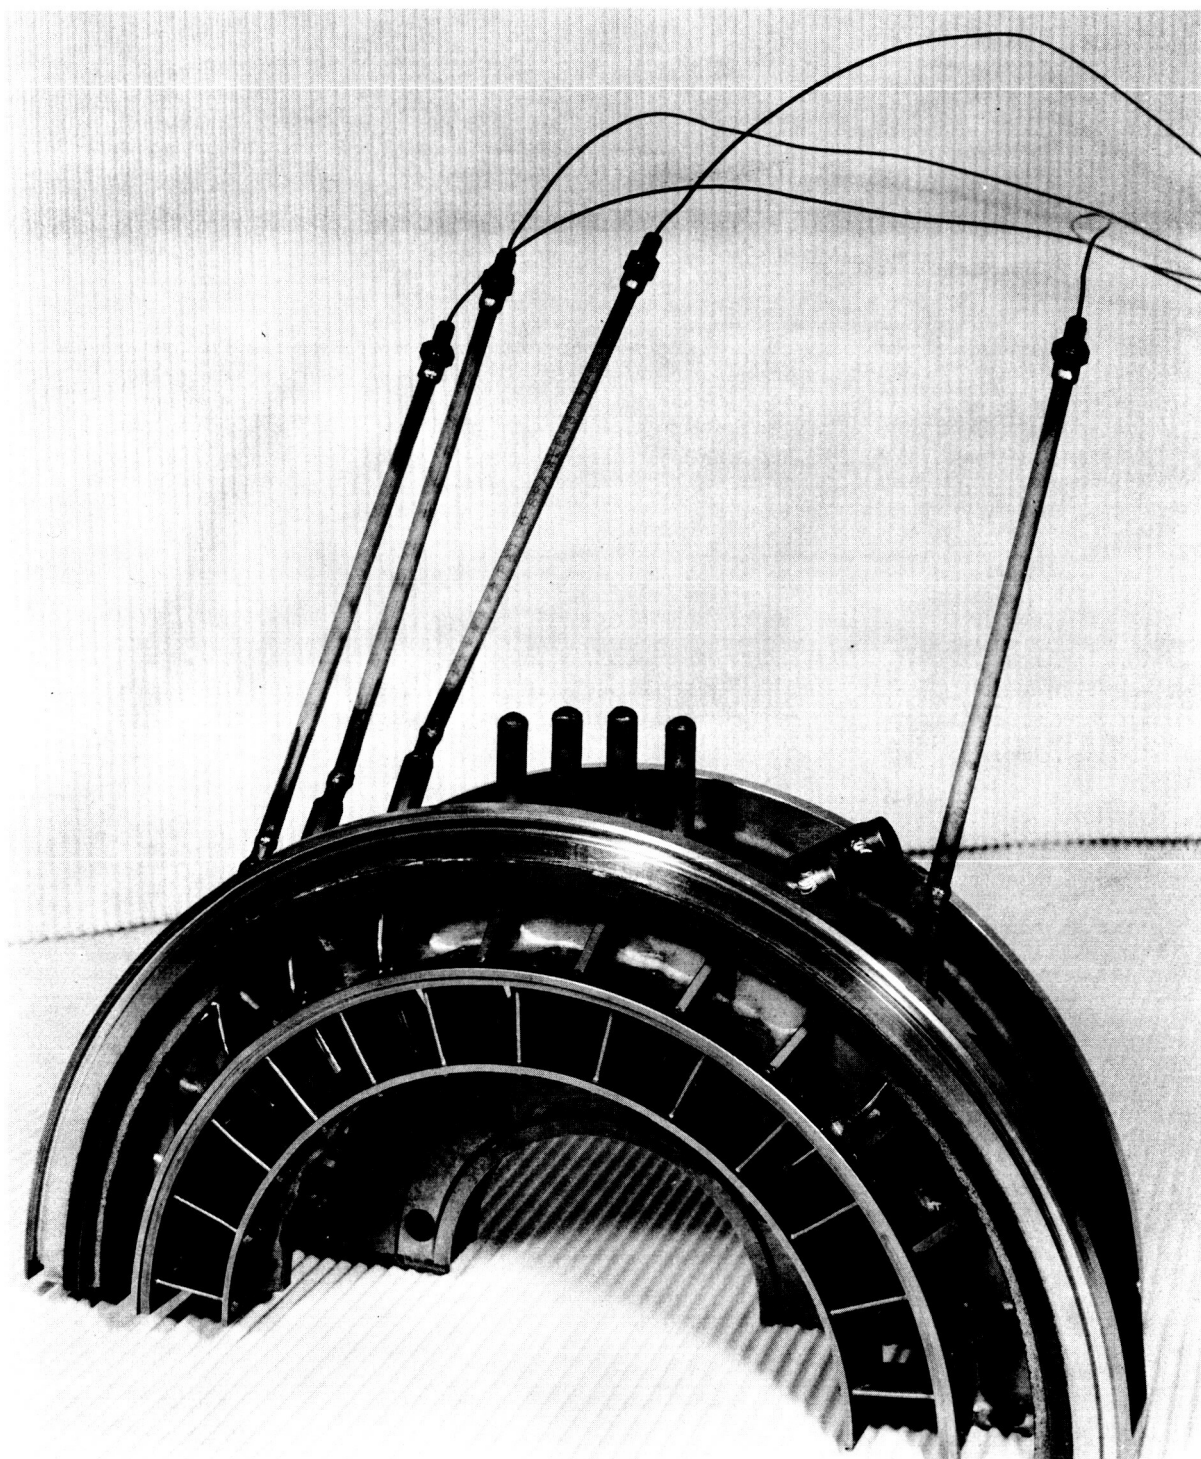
Stator Assembly with Thermocouple Wells Installed.
